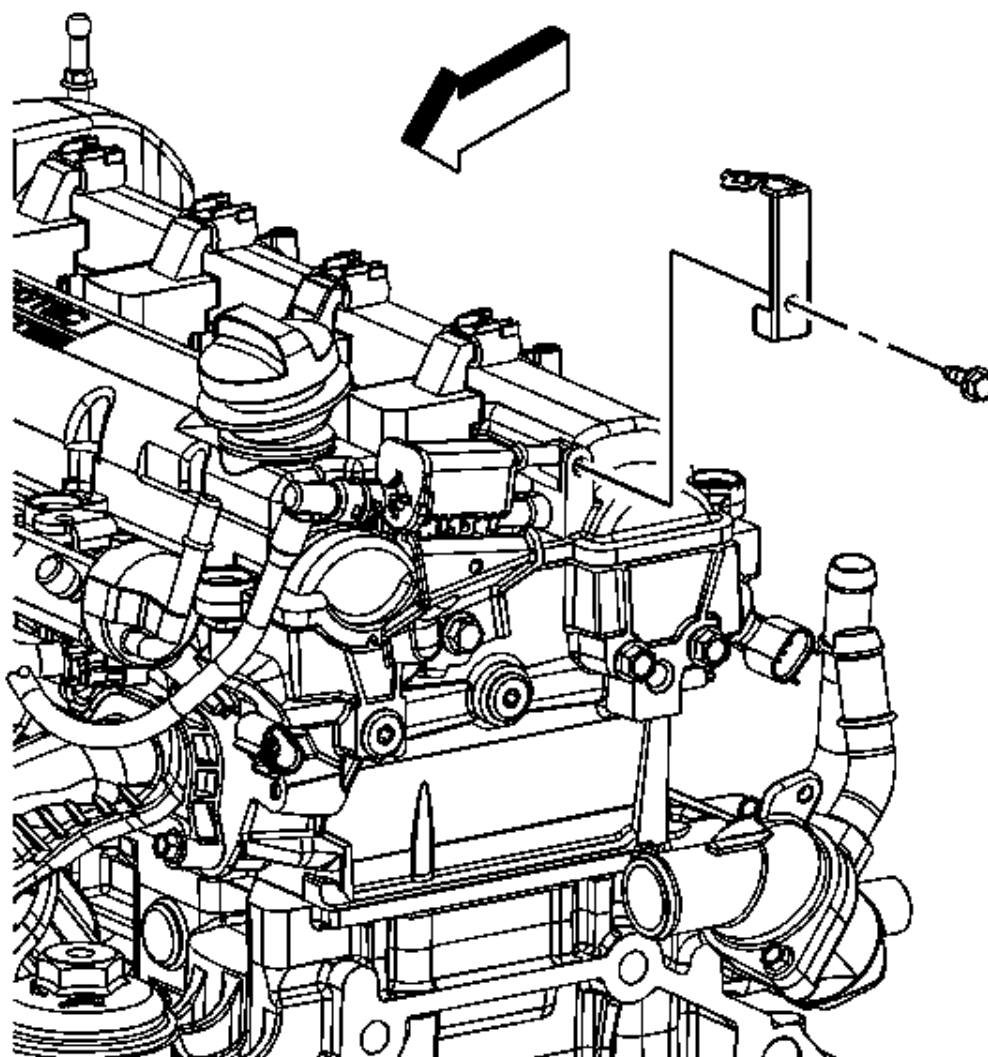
Identifying Fuel Feed Pipe Bracket & Bolt
